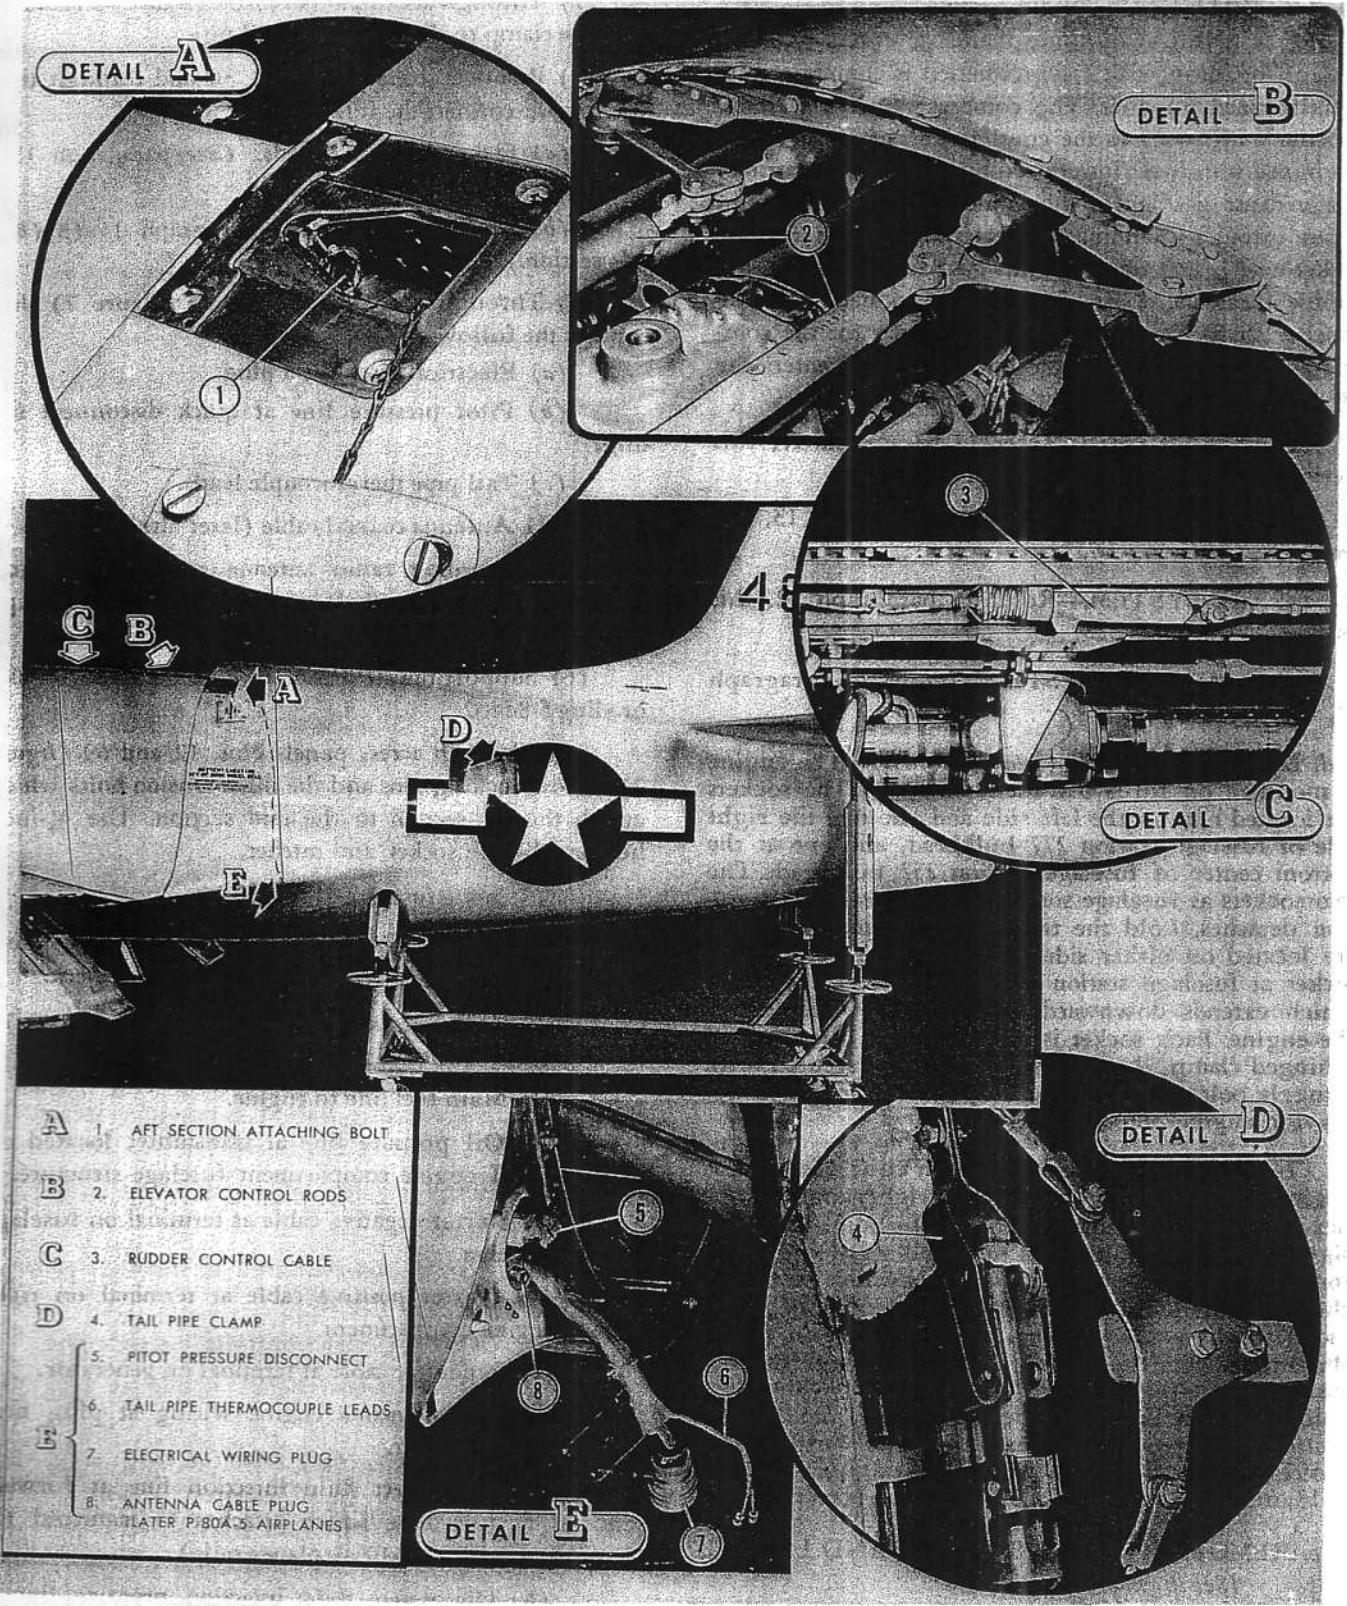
(Sheet 1 of 7 Sheets) — Aft Section and Engine Removal
